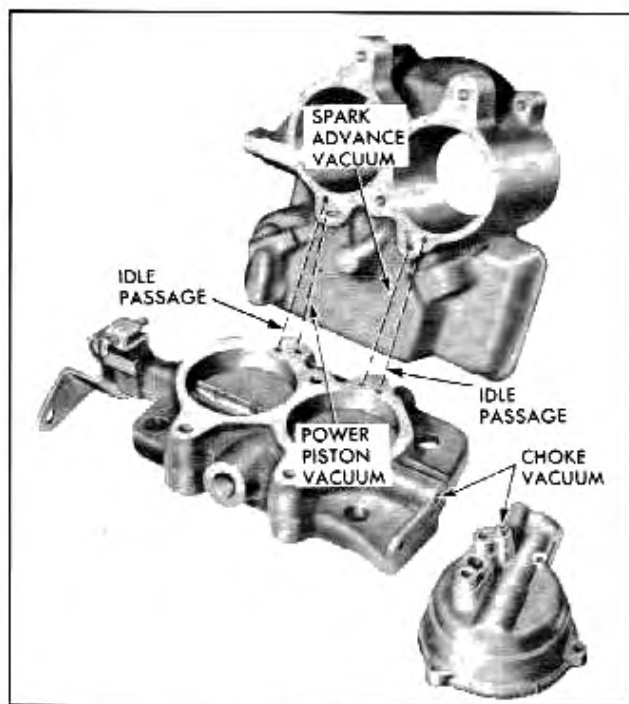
B-19 Passage Identification Flange—Bowl—Choke Housing
